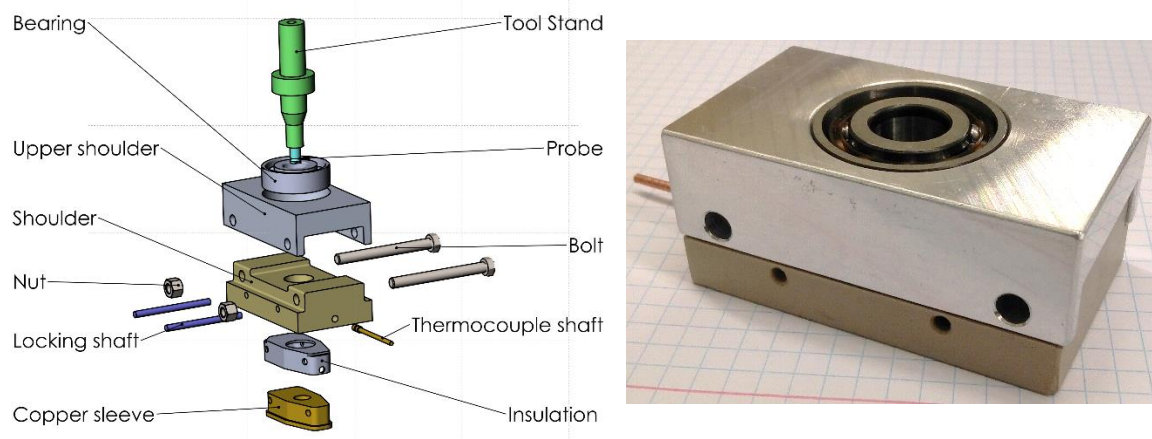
Components of the welding tool (left) and image of welding tool (right).
